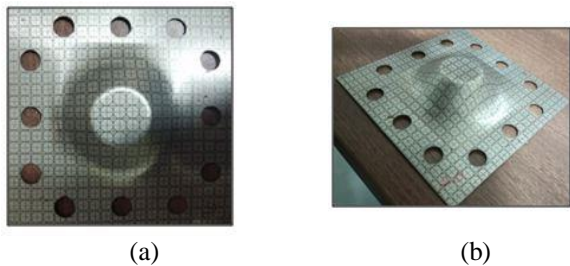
Formed components for UV marking during SPIF process: a) 0.5 mm thick blank; b) 1.0 mm thick blank
